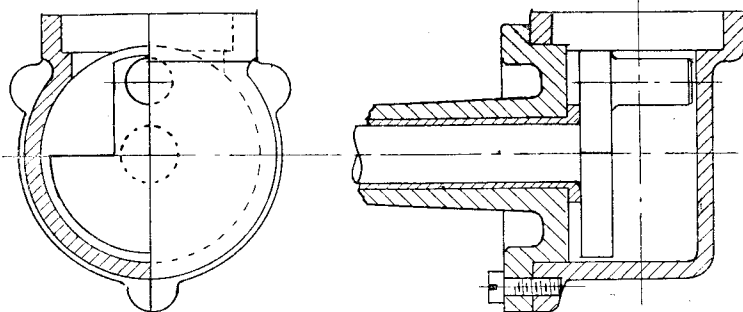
Form of crankcase commonly employed on simple engines with overhung cranks.
